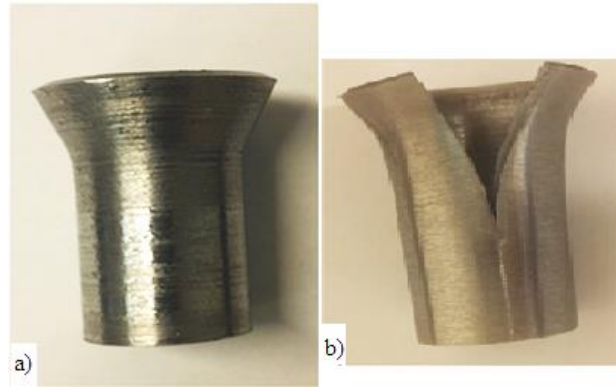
Test Specimen after Flare test: a) F2T tube b) Machined tube
